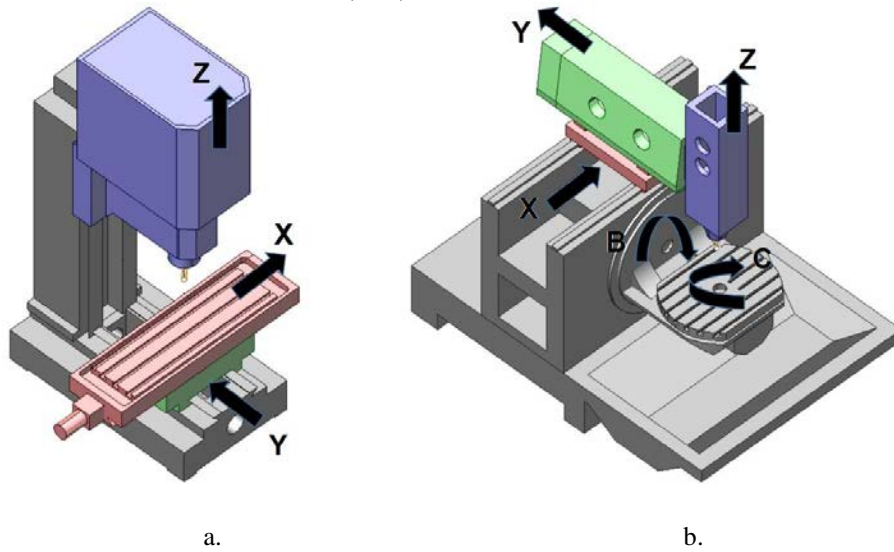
(a) 3-axes CNC milling machine; (b) 5-axes CNC milling machine
